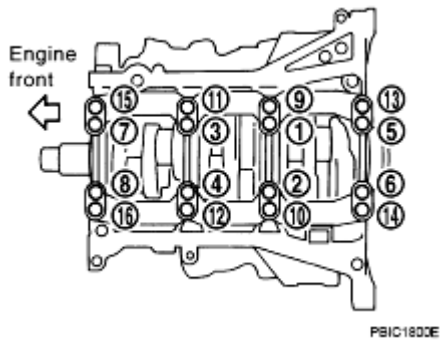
Identifying Main Bearing Cap Bolts Loosening Sequence
